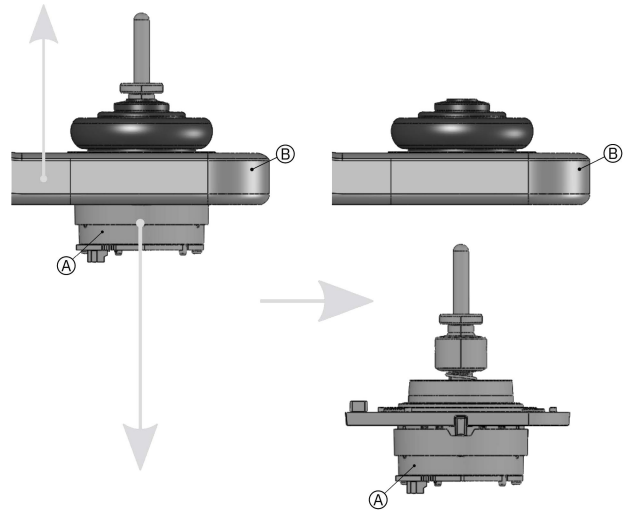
Remove the joystick sub-assembly and gaiter from the chassis
